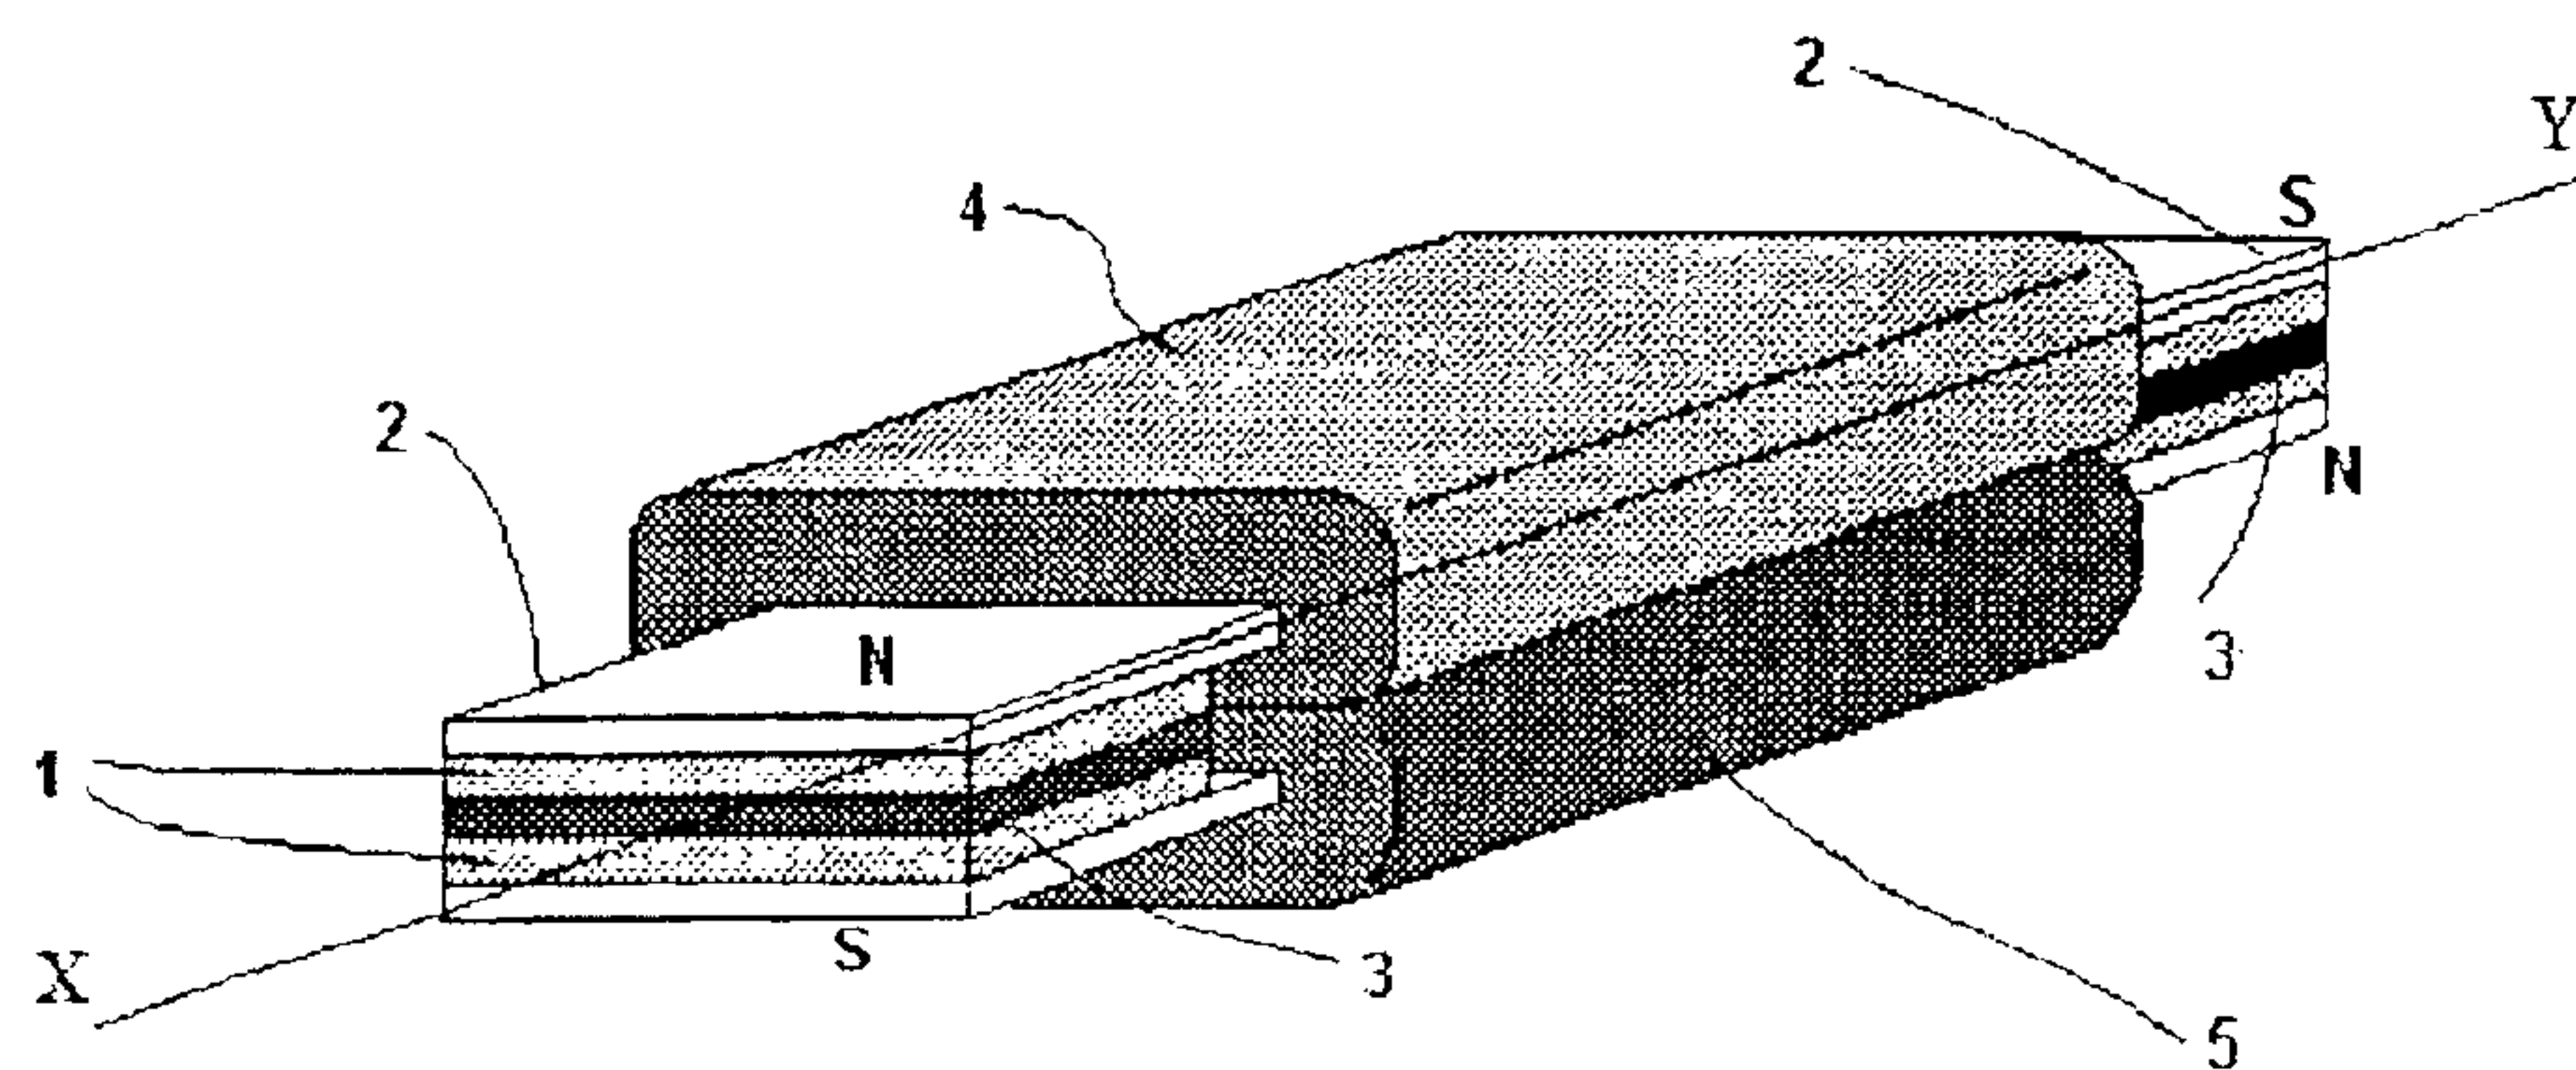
GEOMETRIC PARAMETERS OF AN ORTHOGONAL MAGNECORE ASSEMBLY
